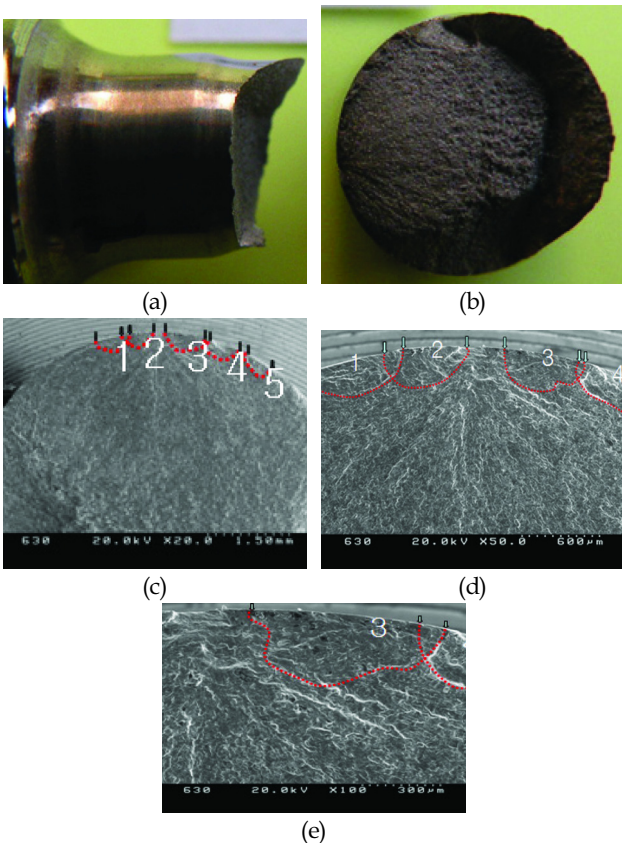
(a); Closeup view of fractured UNSM-treated specimen, (b); front view of Fig. 8 (a), (c); SEM photo of Fig. 8 (b) showing surface cracks, (d); magnified view of surface crack, (e); initiation site of surface crack
